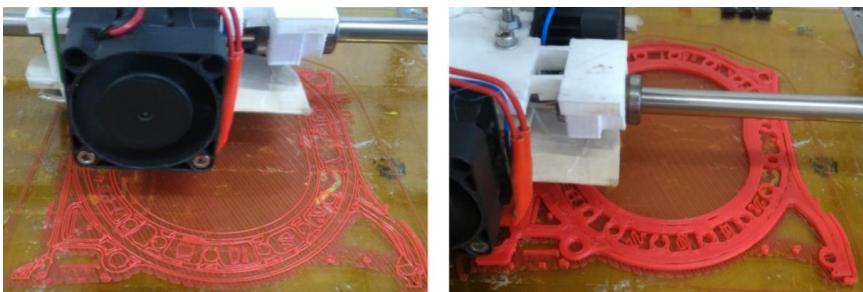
3D print of the Wankel engine combustion chamber [2].
